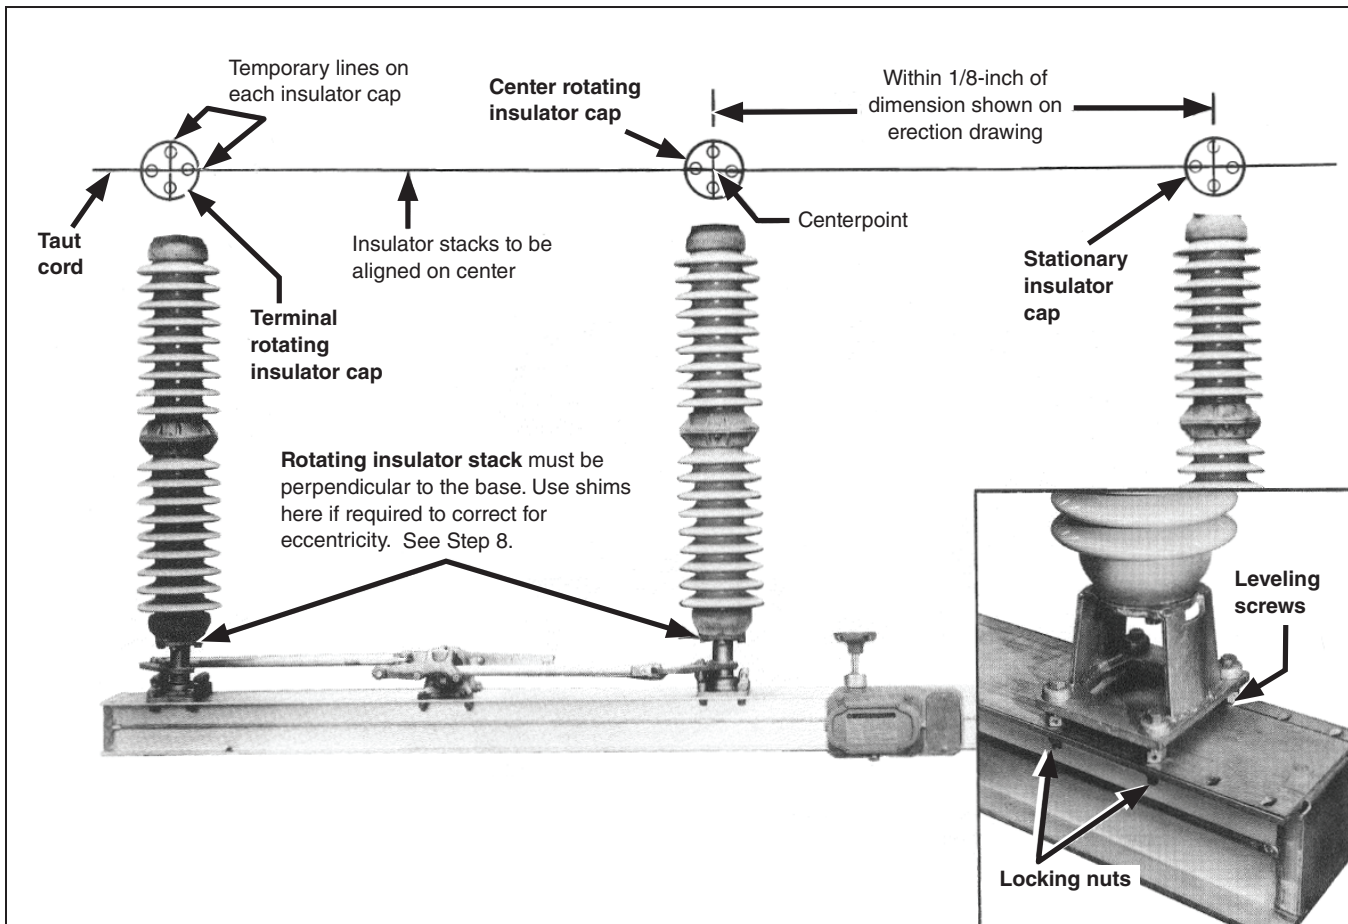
Obtaining critical dimension and alignment with shims and leveling screws.
